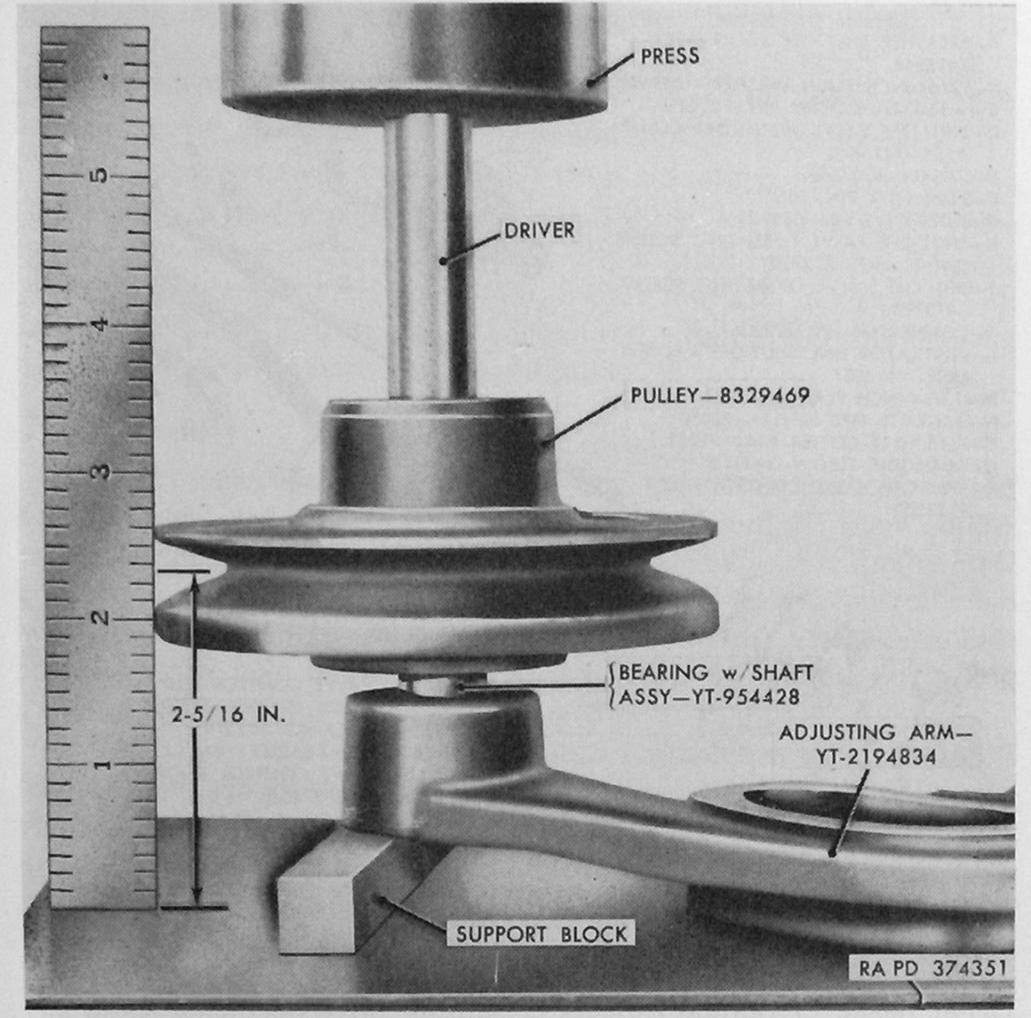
Pressing idler pulley and bearing with shaft assembly into adjusting armengine assembly 8329440.
